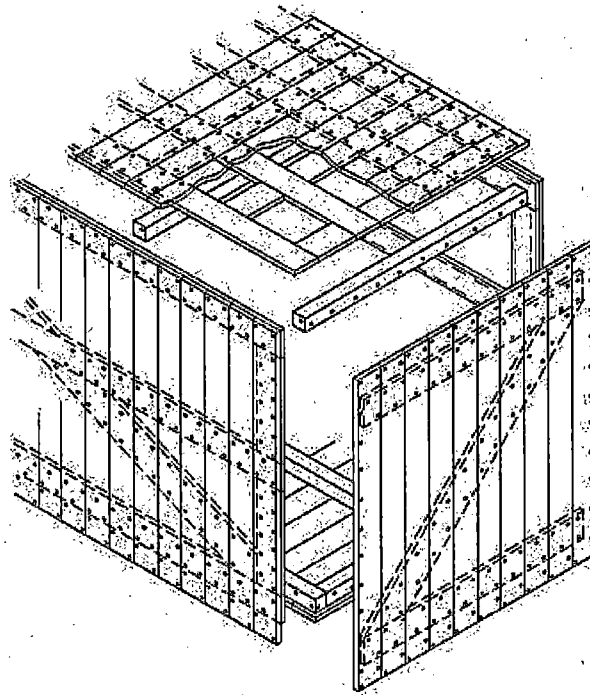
Def Stan 81-135; Style 1, and 2 Case (exploded view
